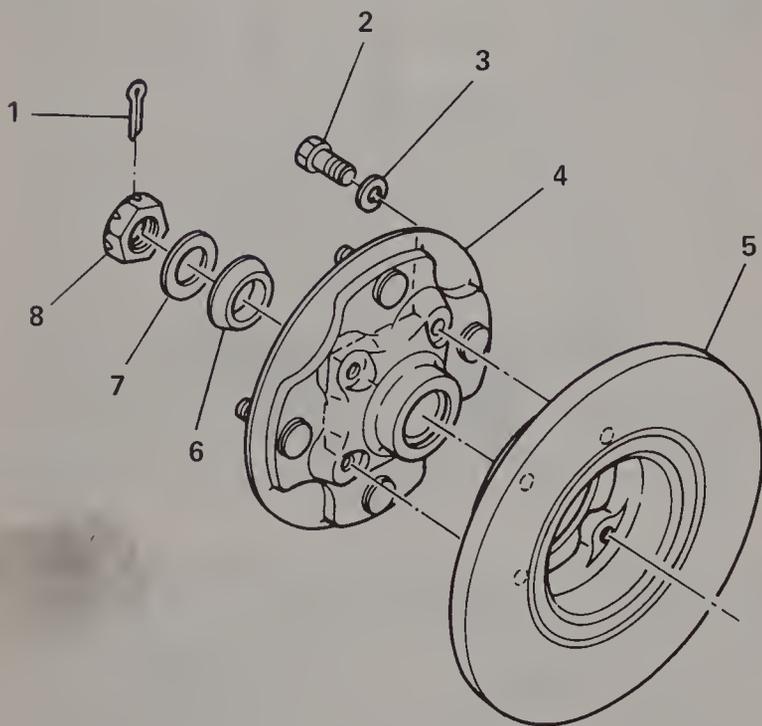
Front disc rotor components – exploded view (Sec 9)
